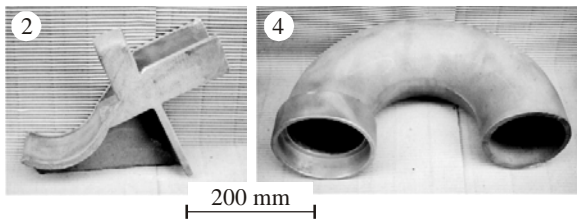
Cast radiant tube support (2) and tube-connecting elbow (4) (designation of components as in Fig. 6) [5]; material: GX40NiCrSiNb35-17
